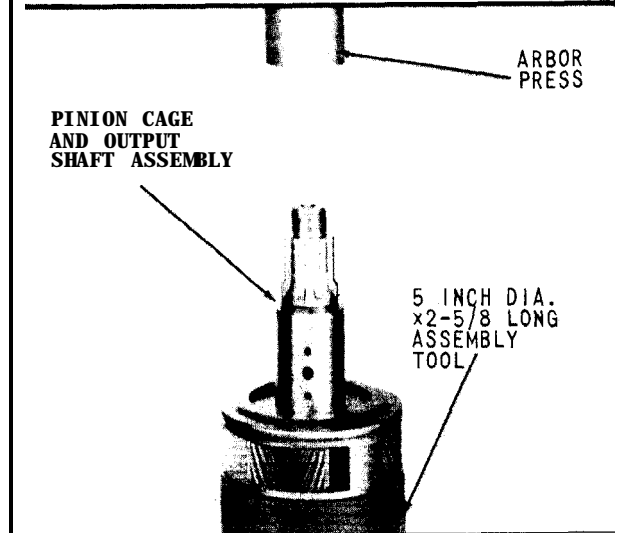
Pinion Cage and Output Shaft Assembly in Place on Arbor Press
